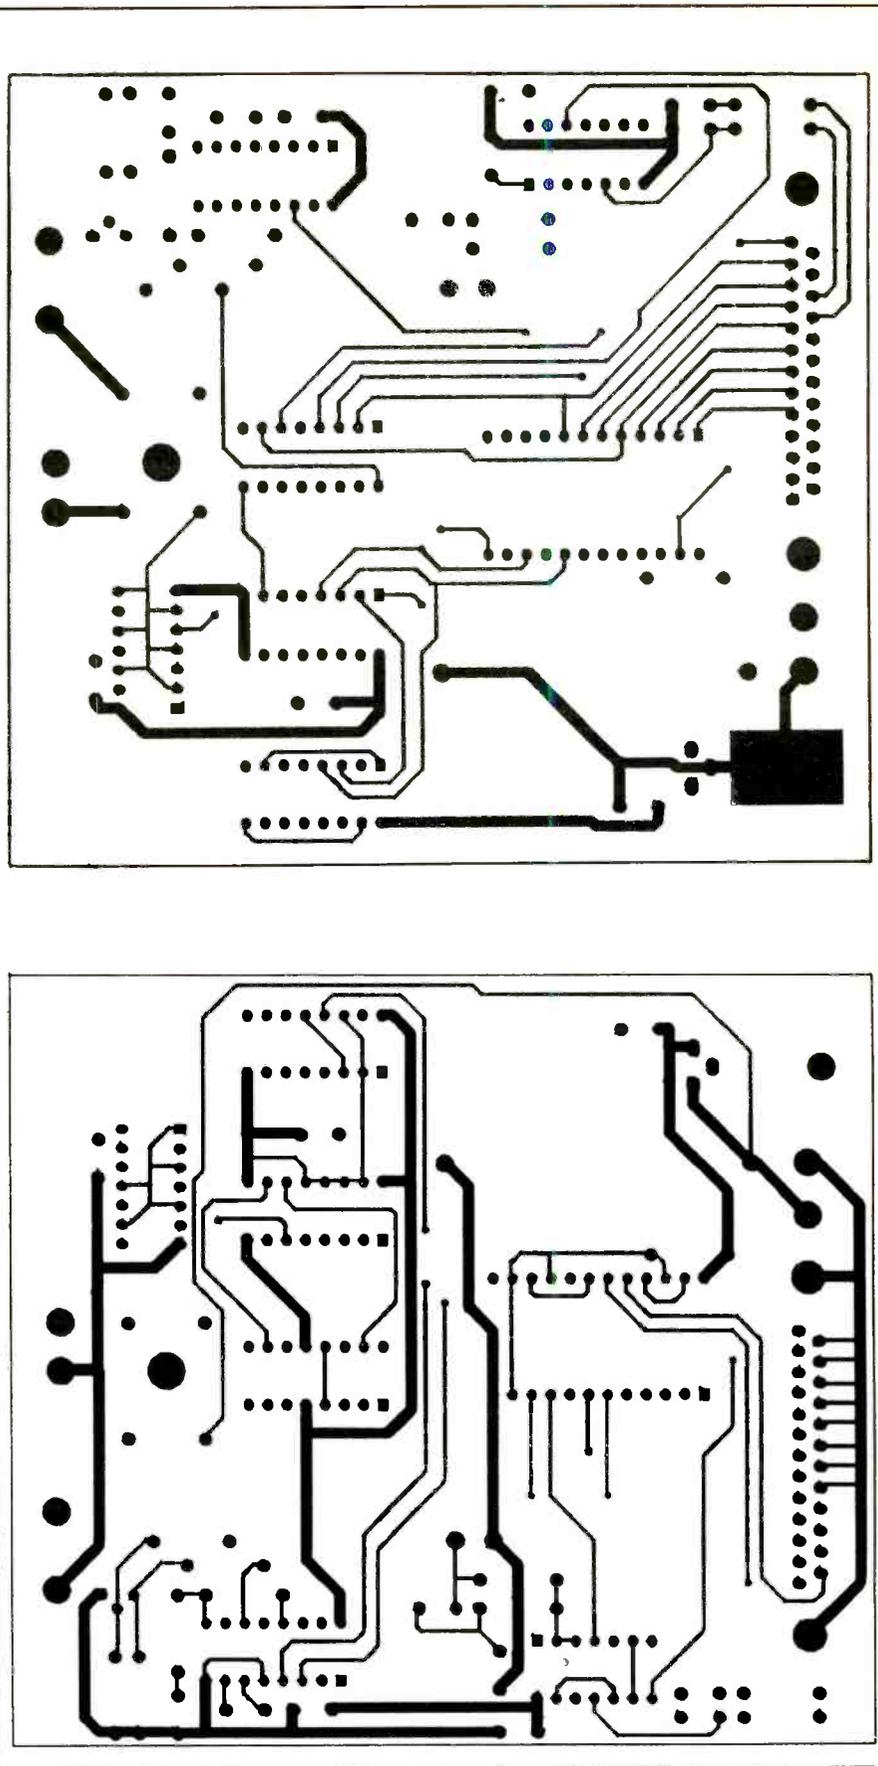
Actual-size etching-and-drilling guide for making printed-circuit board for project.
